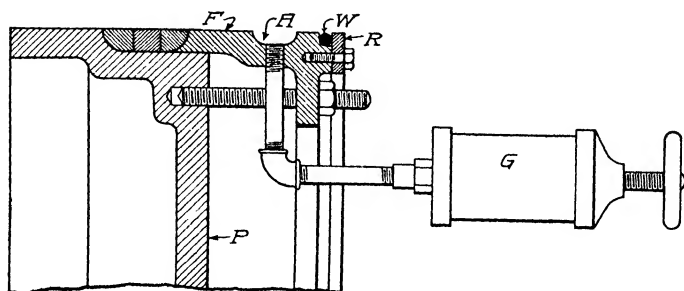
Lubricating Device for Piston of Hydraulic Machine
